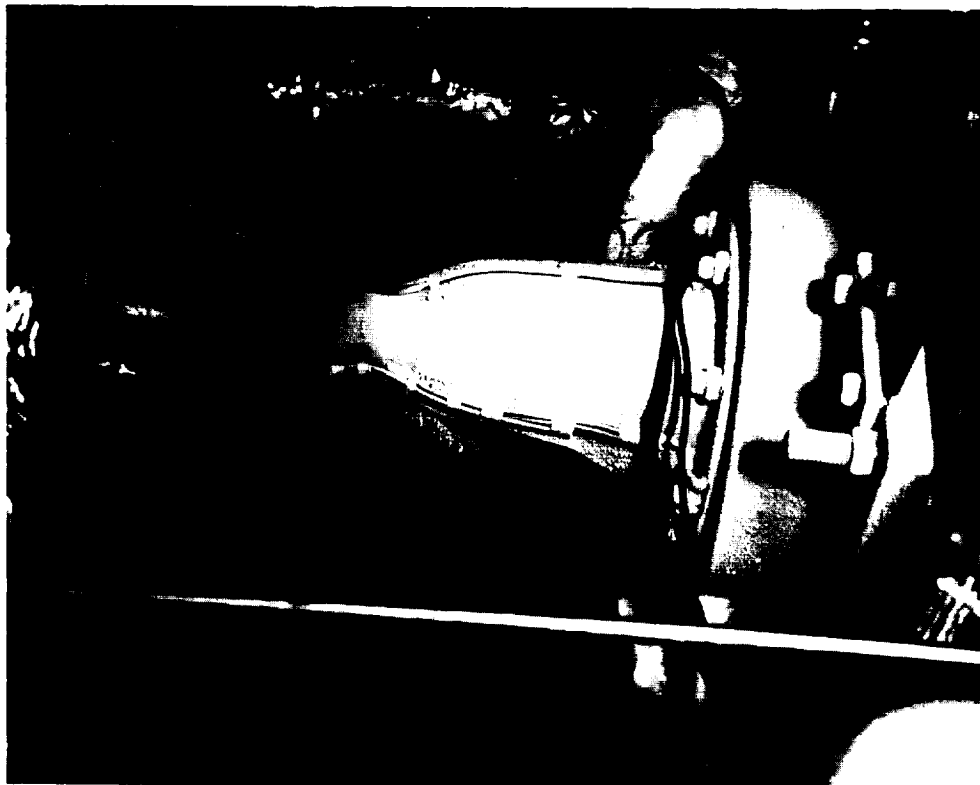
Installation of Thruster Assembly on HA5 Thrust Mount
